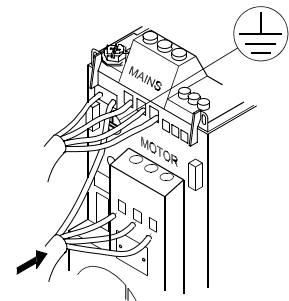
Mounting of Ground Cable, Mains, and Motor Wires
